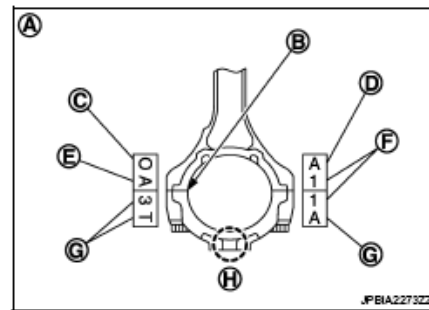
Identifying Stamped Cylinder Number Marks On Connecting Rod
